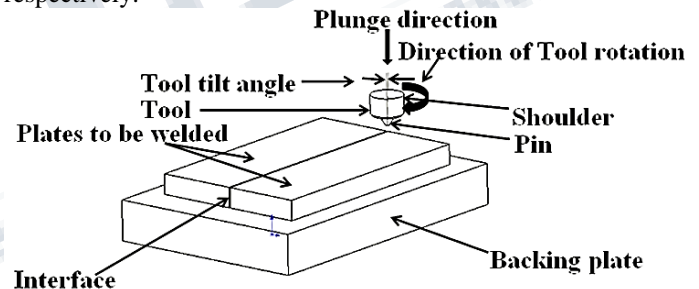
Schematic diagram of Friction Stir Welding process before welding starts
